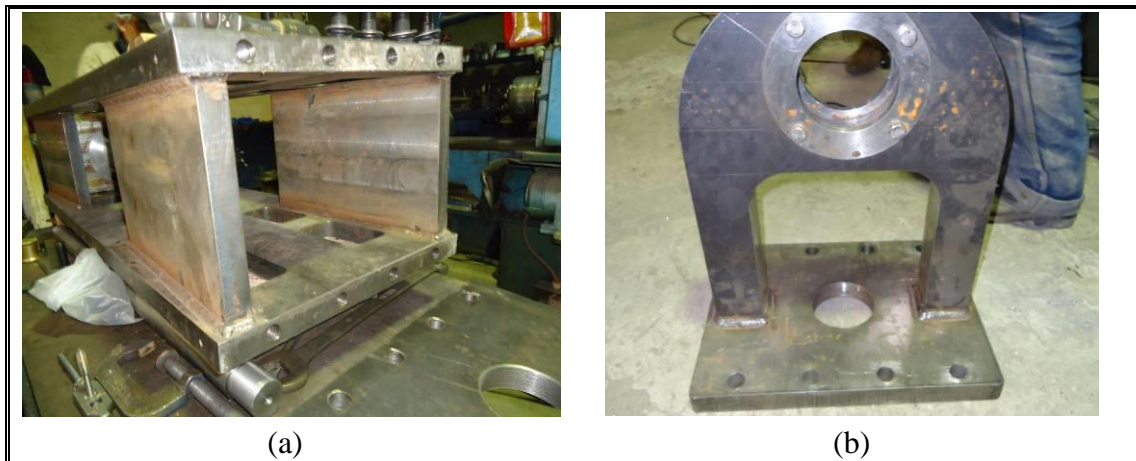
Assembly of end caps, an end support and both pre-loading devices
